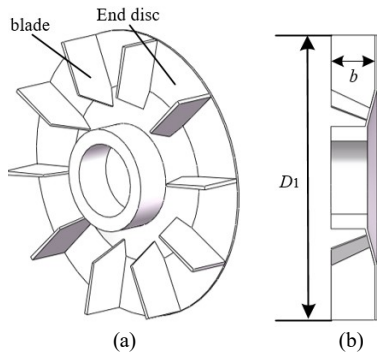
Cooling fan structure diagram. (a) three-dimensional view. (b) Side view section.
